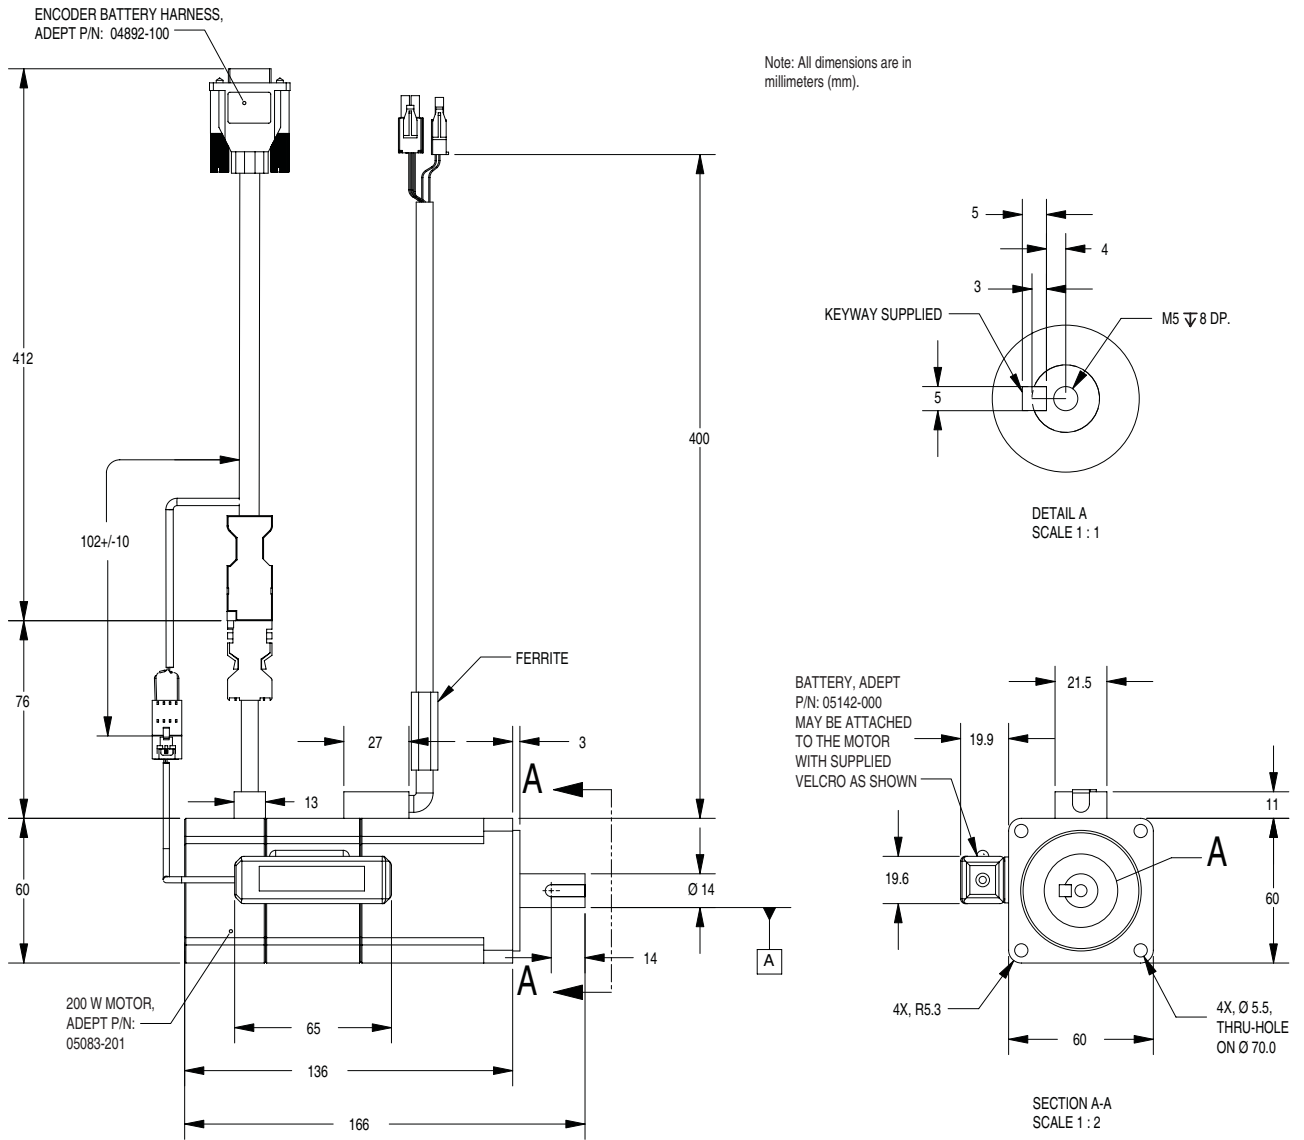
200 W Motor (with brake) Dimension Drawing
